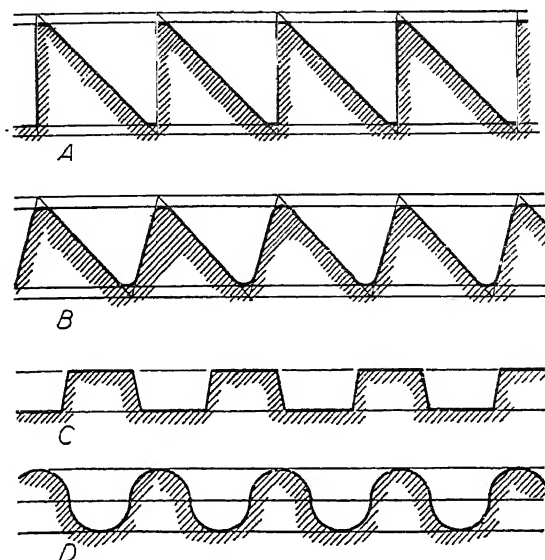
A, Buttress Thread ; B, Modified Buttress Thread ; C, Shallow Acme Thread ; D, Knuckle Thread.
